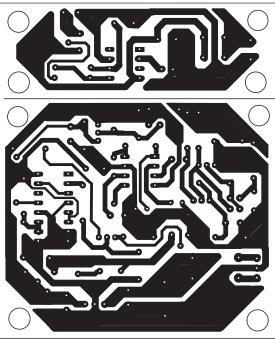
Actual-size, single-side PCB for sound-operated on/off switch
